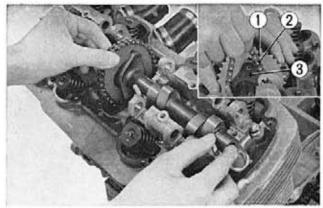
(1) Cam sprocket (2) Cam chain
